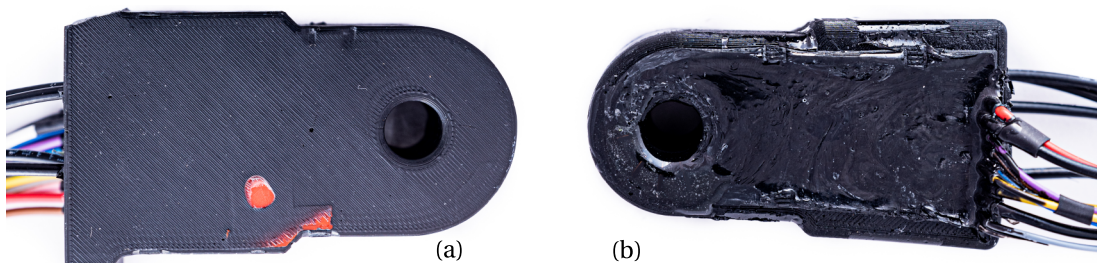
Sensor prototypes after cast moulding in PU-resin. *a:* Sensor A; *b:* Sensor B.
